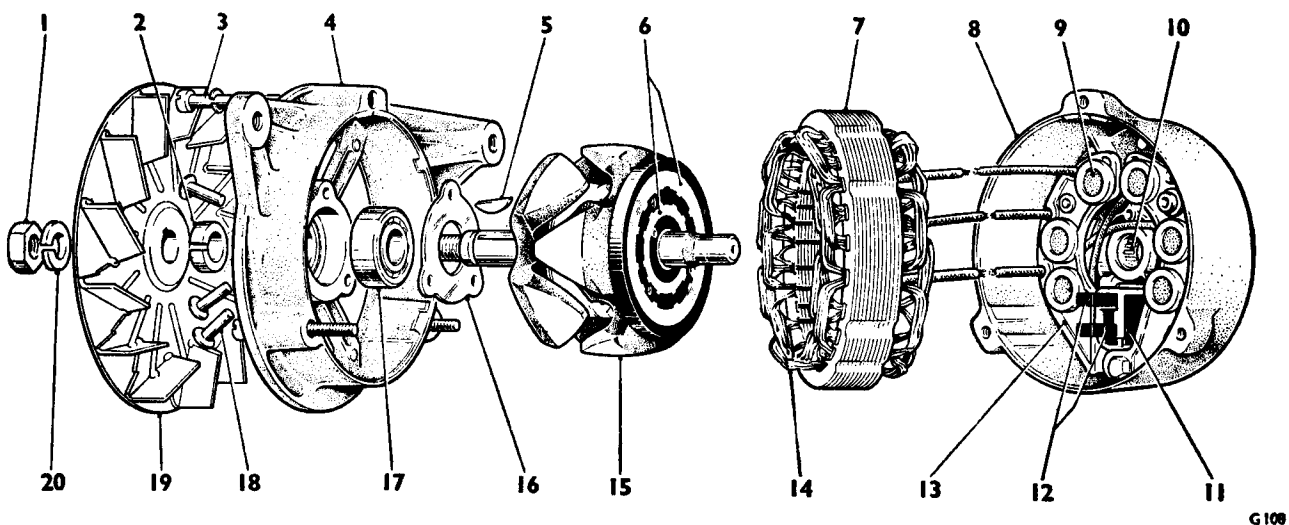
EXPLODED VIEW OF 11 AC ALTERNATOR
